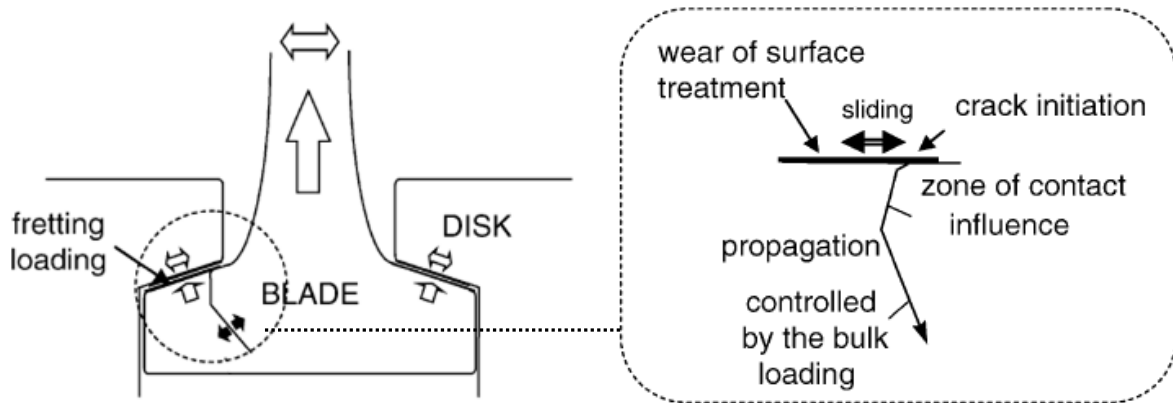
Illustration of the fretting damage observed in dovetail contacts of turbine engines.
